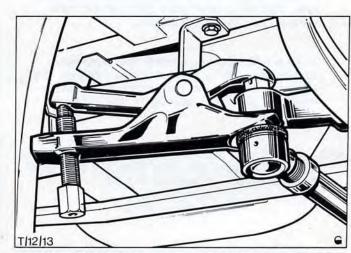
Detach track rod ball joints from steering arms using service tool 13 006.
